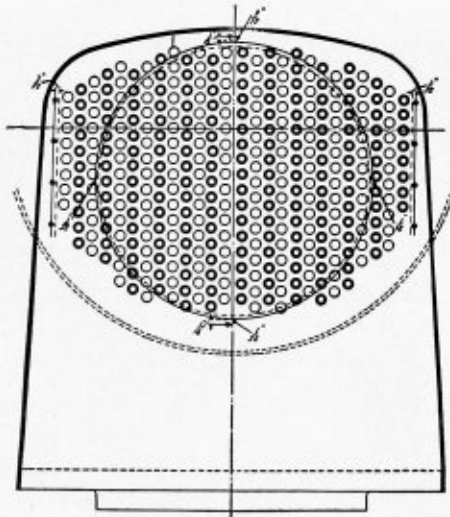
EXPANSION OF TUBE SHEET DUE TO PROSSERING.
